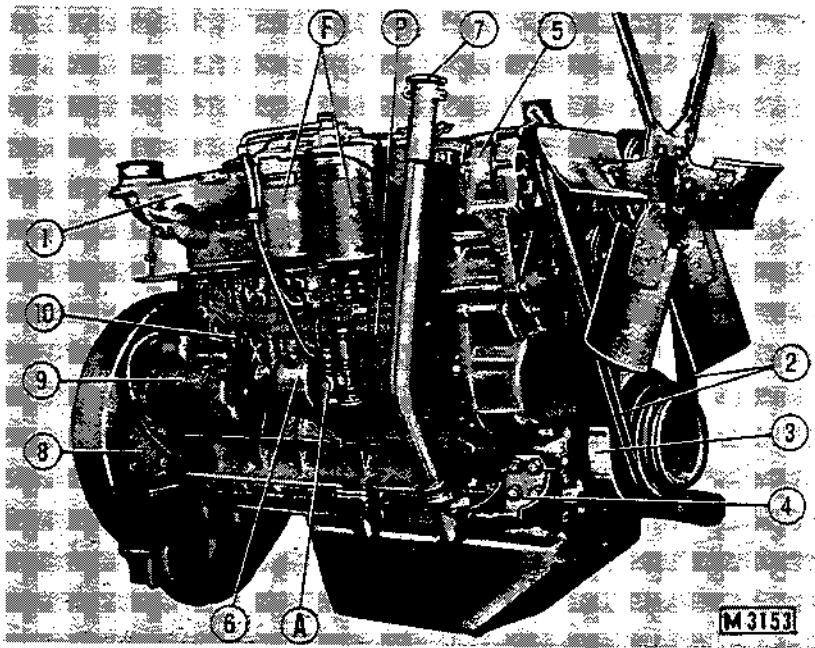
R.H. Side view of engine 8360.05.560 (fitted on crawler loader FL10-C.)
